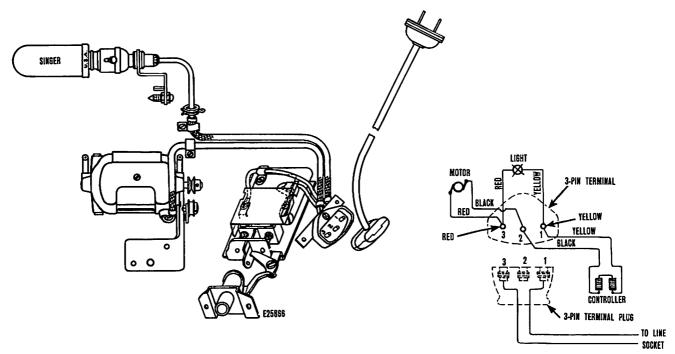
Wiring Diagram for BU107P Motor on 24-65 Machine in Portable Set No. 205
